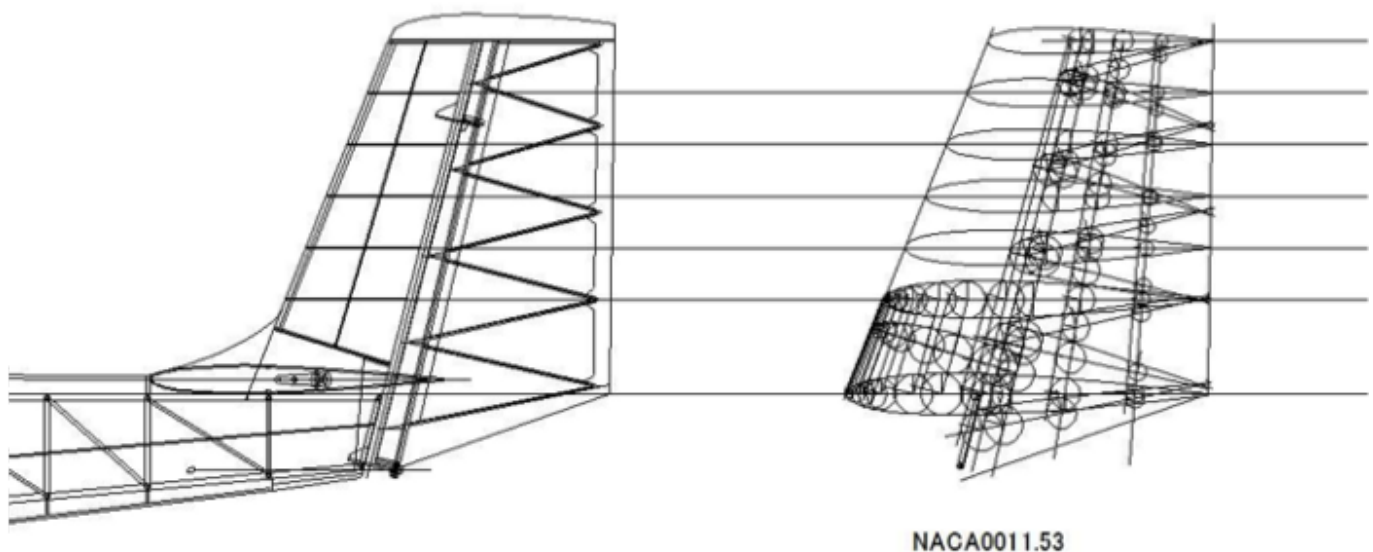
Control surface attachment; actual aircraft (left), usual RC model (right).
